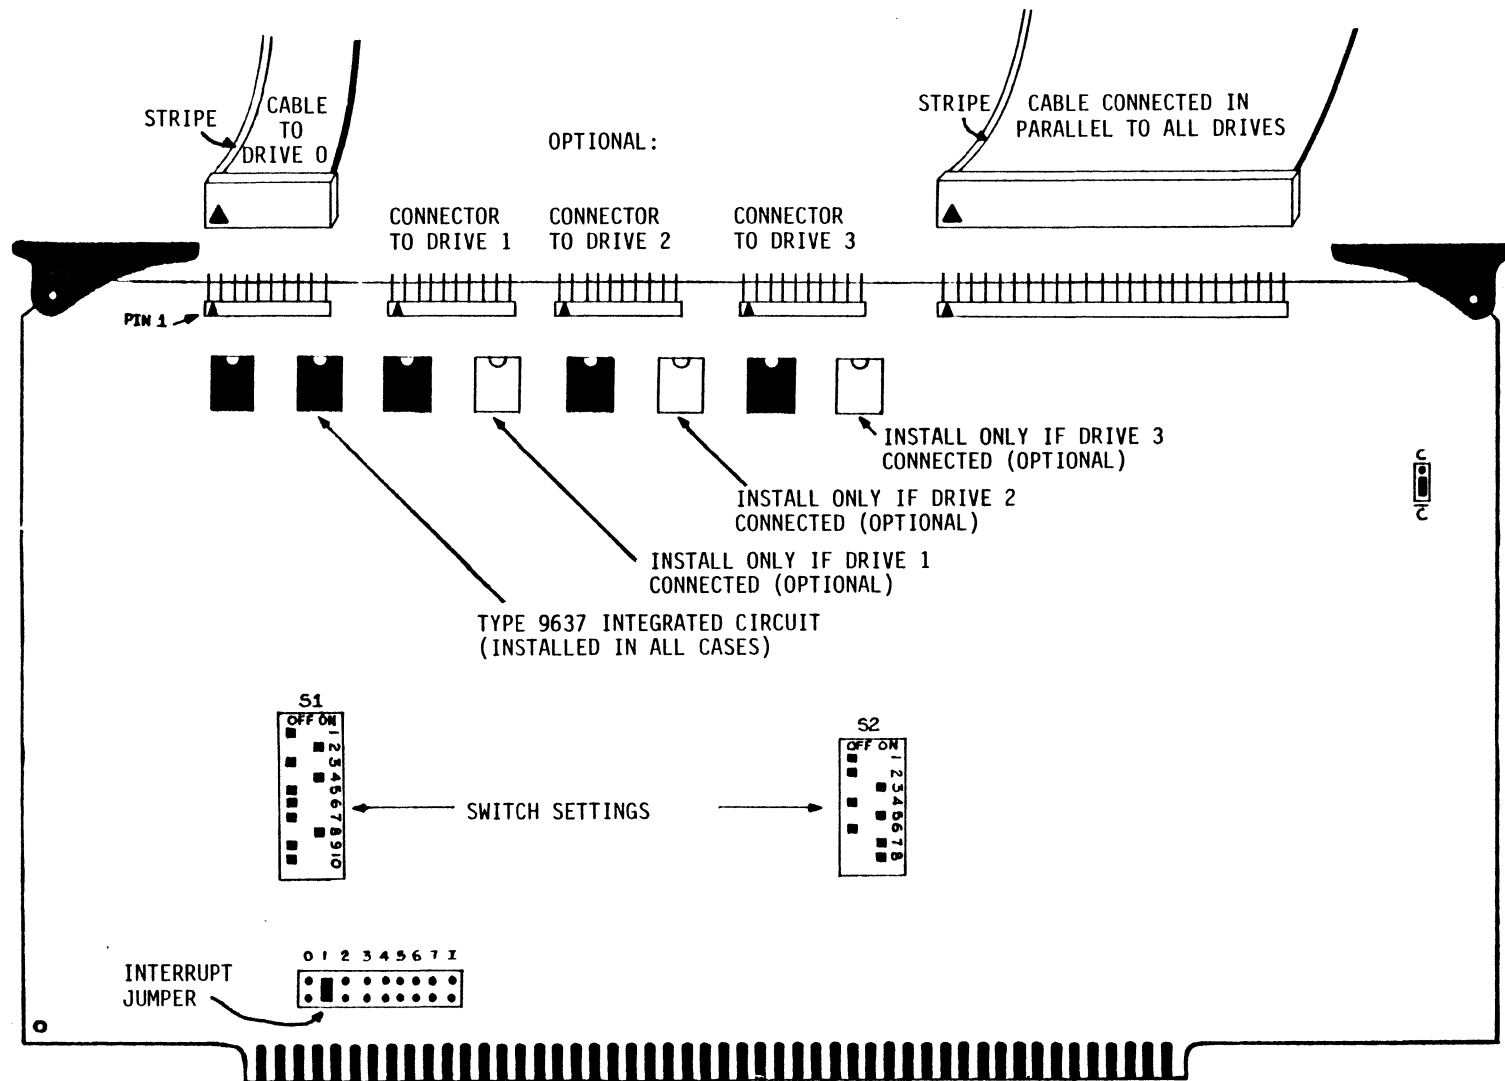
Switch and jumper settings for WDC1 board 1 - Hard Disk Controller
